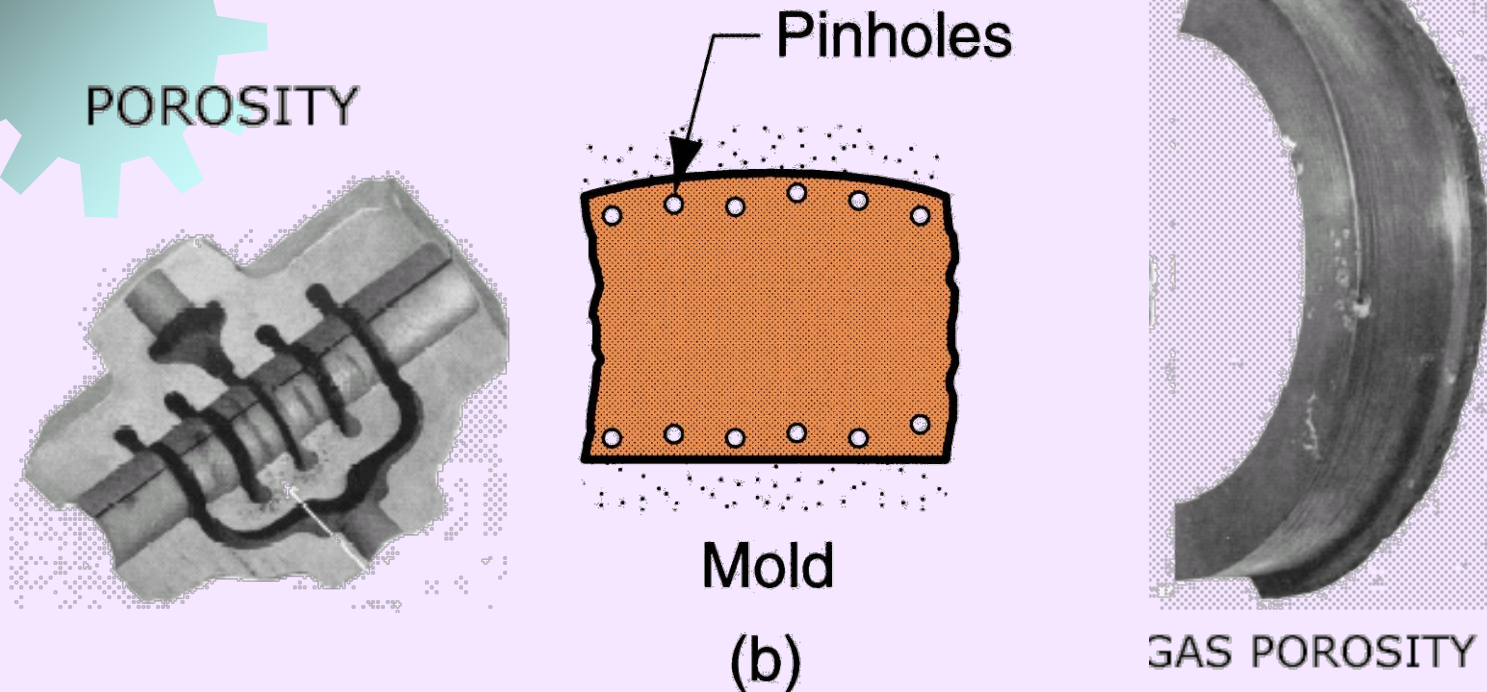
Common defects in sand castings: (b) pin holes
